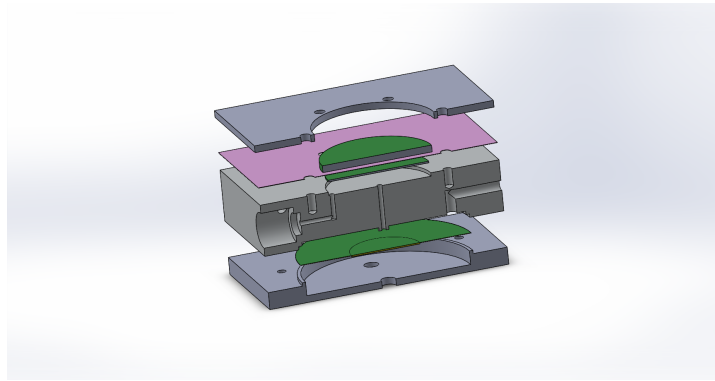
Exploded view of the actuator. The purple sheet is the moving membrane, the large green disk represents the piezo buzzer
